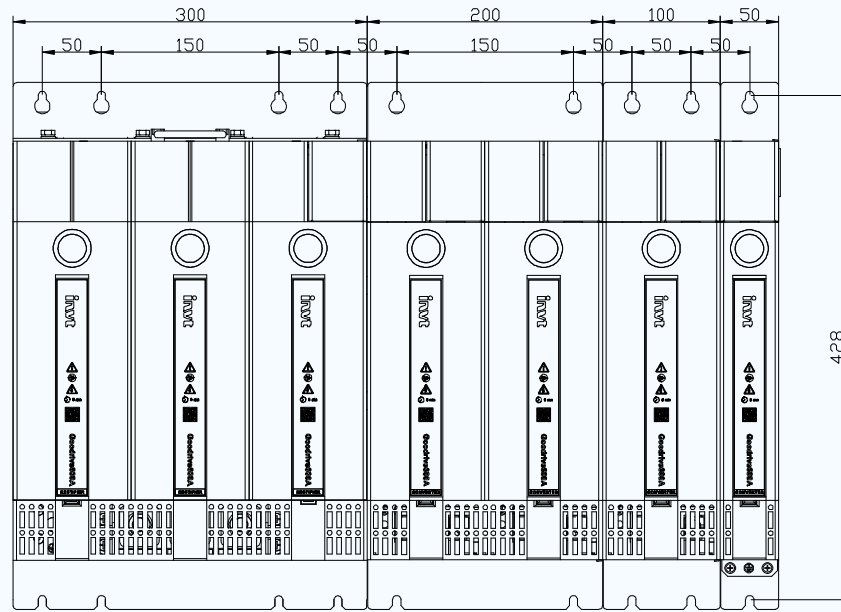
Flange mounting drawing for the 380V rectifier and inverter units
